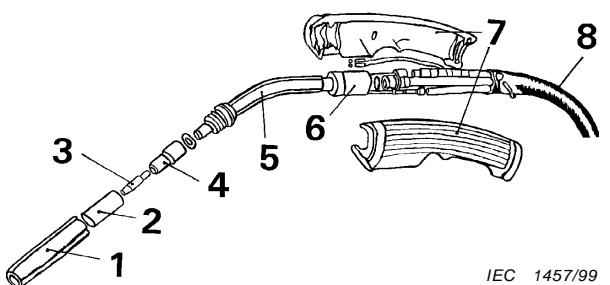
Torch for metal inert/active gas (MIG/MAG) or self-shielded flux-cored arc welding
